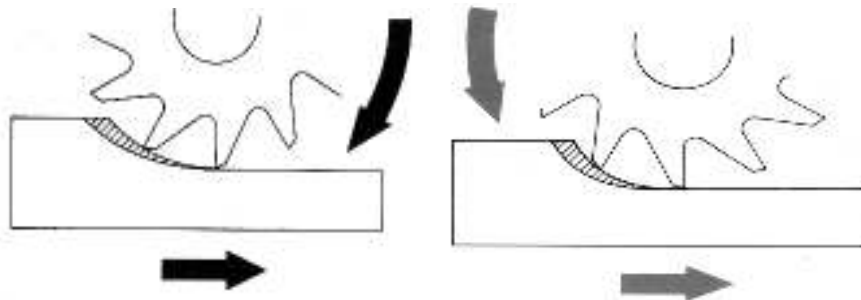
a) Conventional (Up) milling b) Climb (Down) milling
